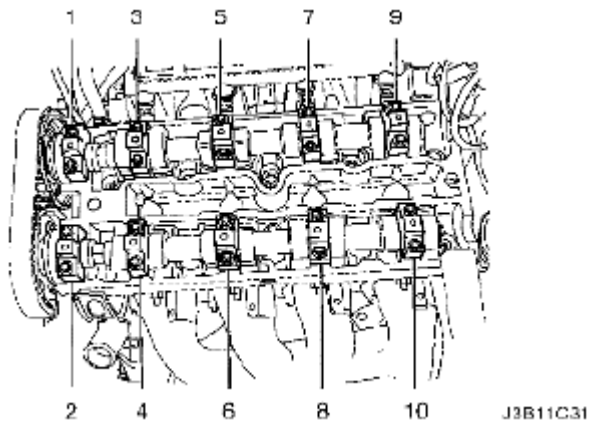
Identifying Camshaft Bearing Cap Bolt Removal Sequence
